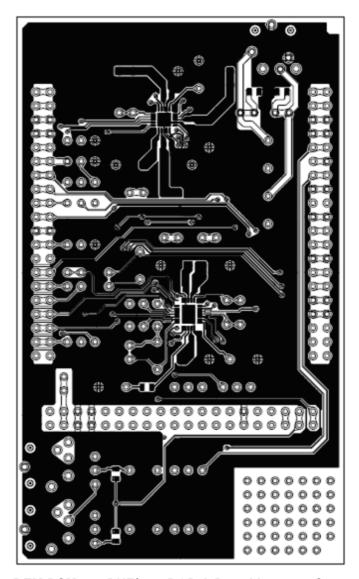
DEM-PCM1870RHF/1774RGP-A Board Layout—Component Side
